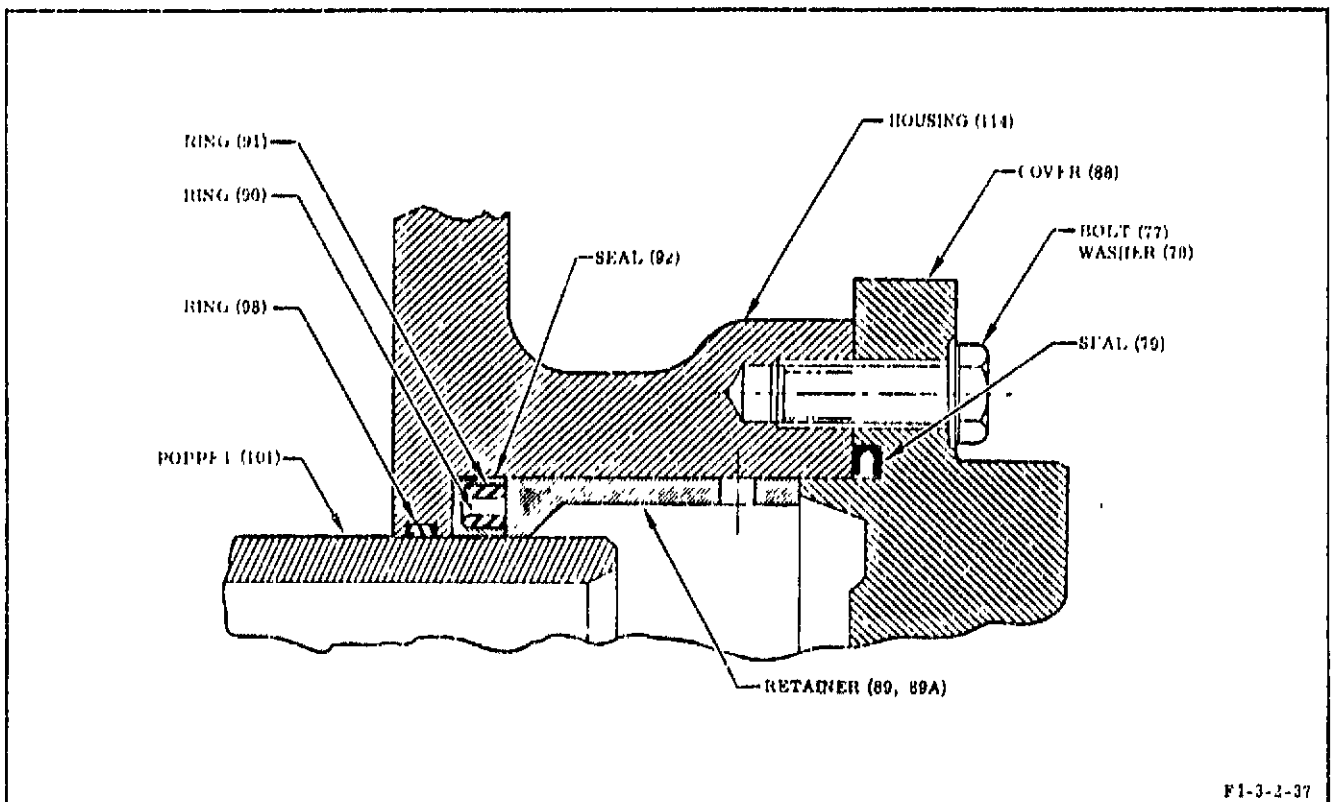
Oxidizer Valve Ring and Seal Installation
